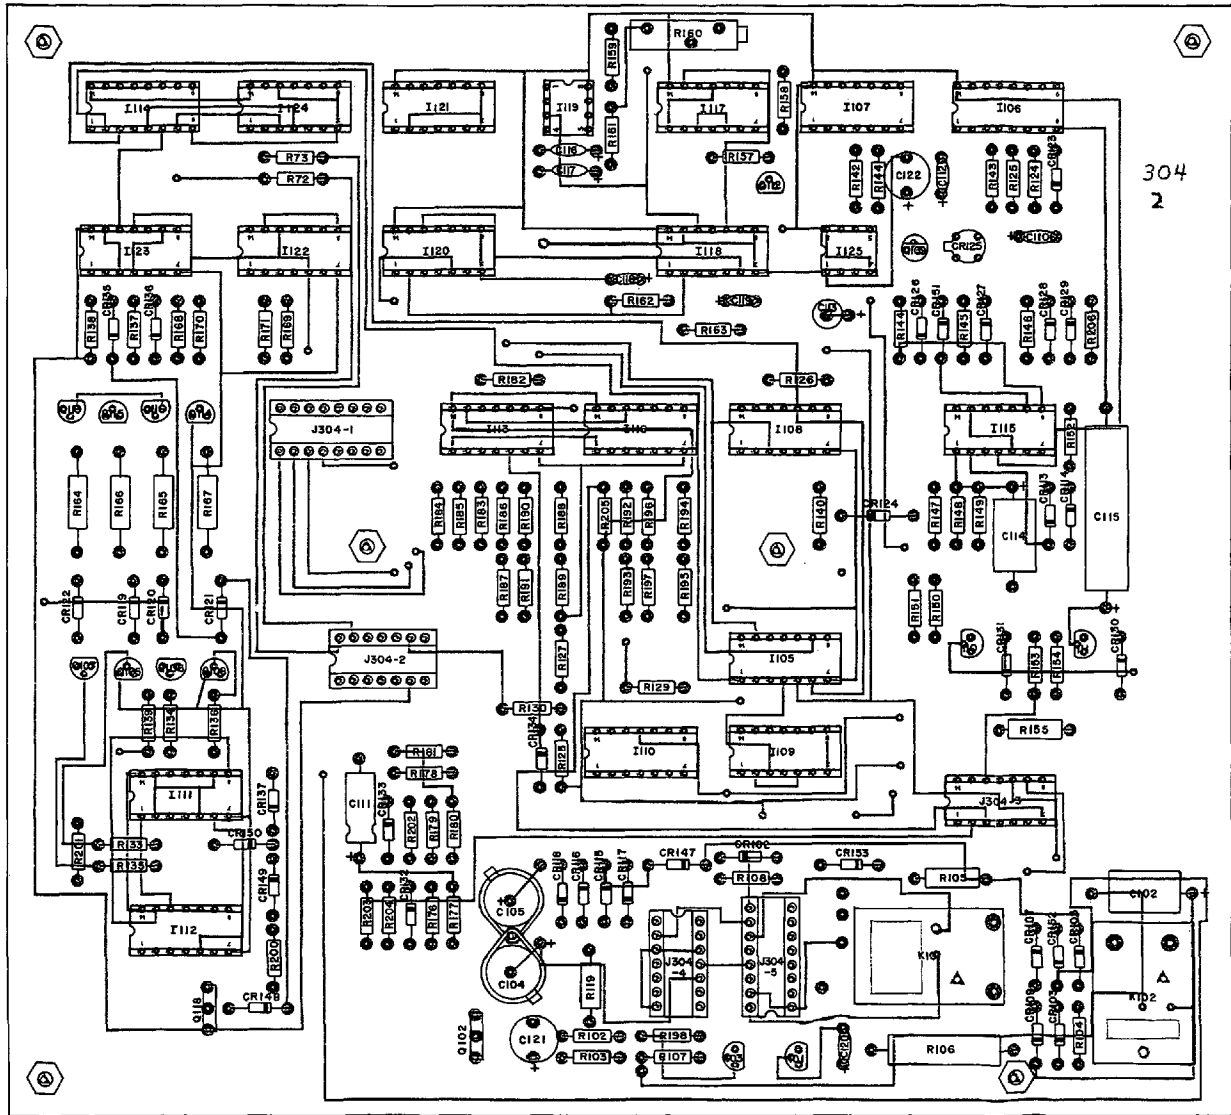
P.C. BOARD ASSEMBLY, BOARD 304, DRAWING
